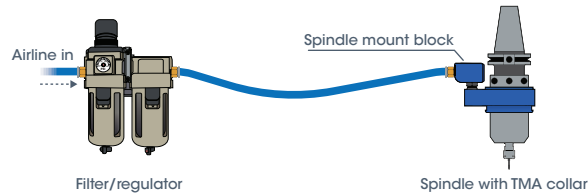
A clean airline from a filter/regulator to an Air Turbine Spindle® with the Tool Changer Mounting Assembly.
